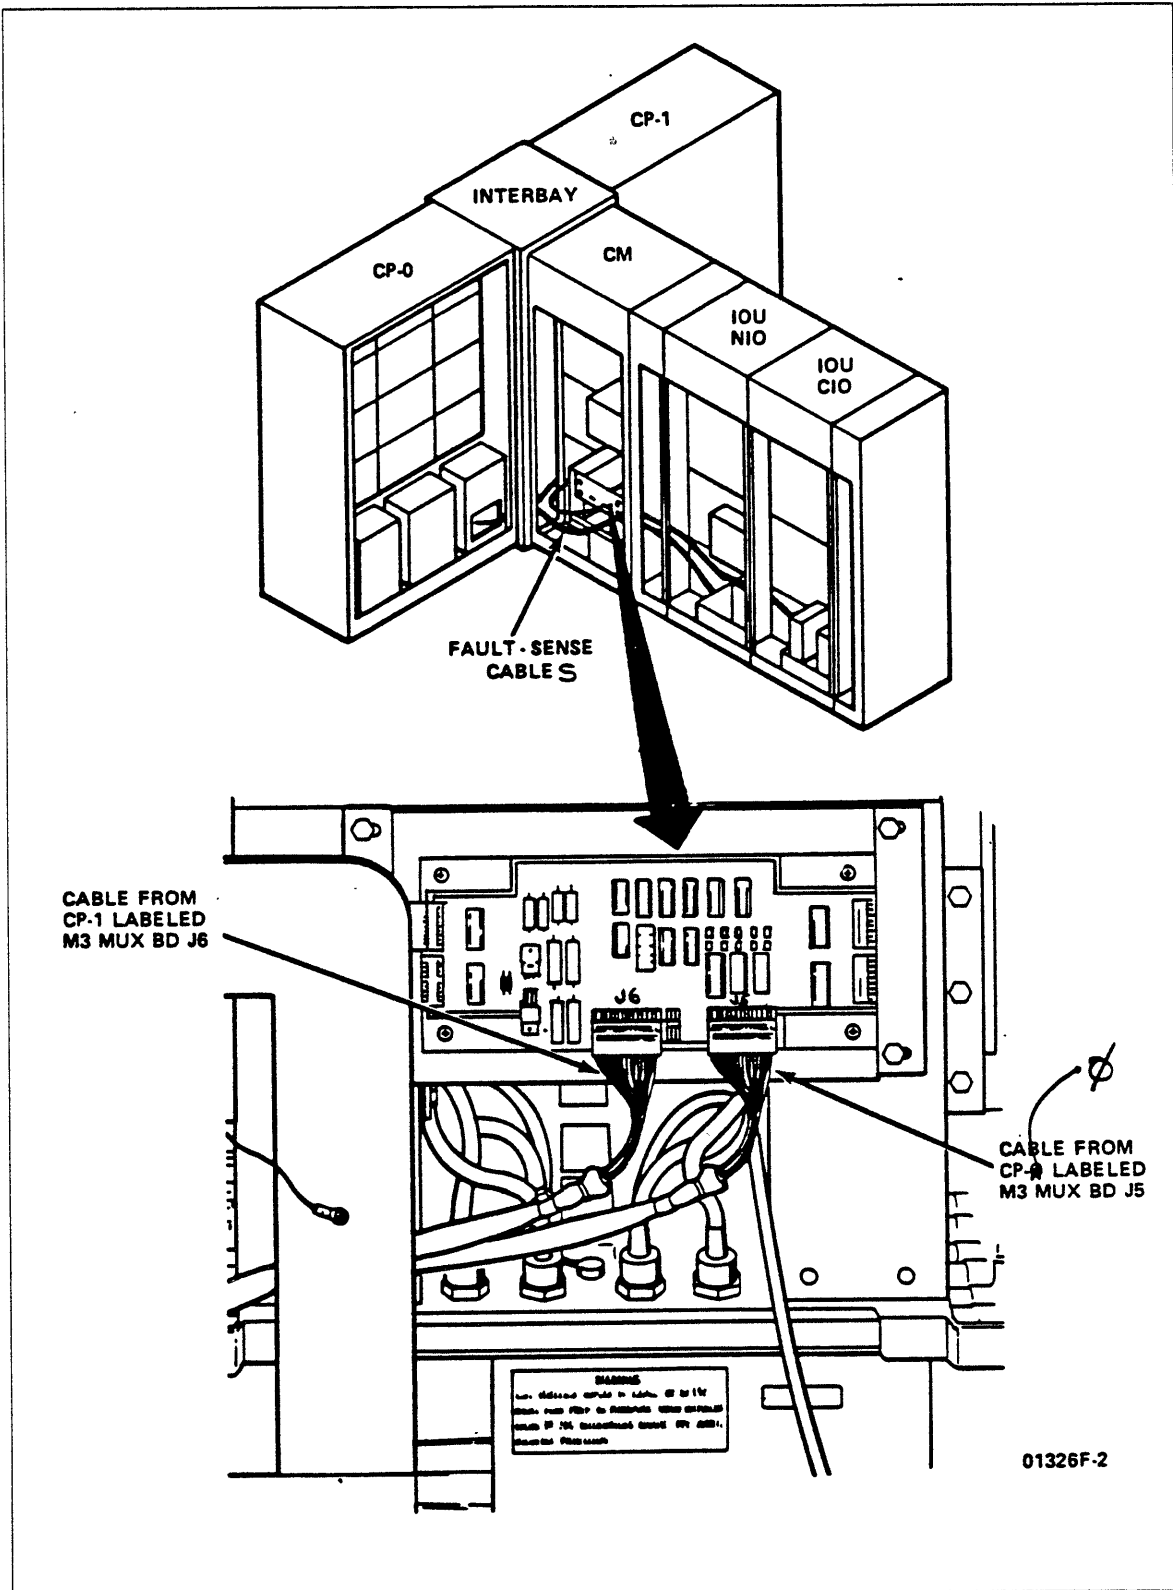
Fault-sense Cable Connections to CM Multiplexer Board
